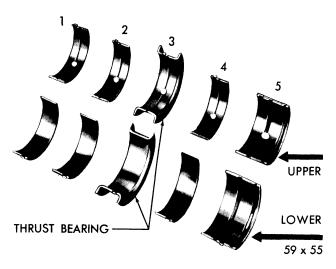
Upper and lower bearing inserts— Fury V-800 engine
